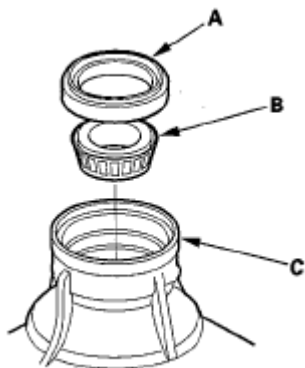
Identifying Oil Seal, Roller Bearing And Transfer Housing
